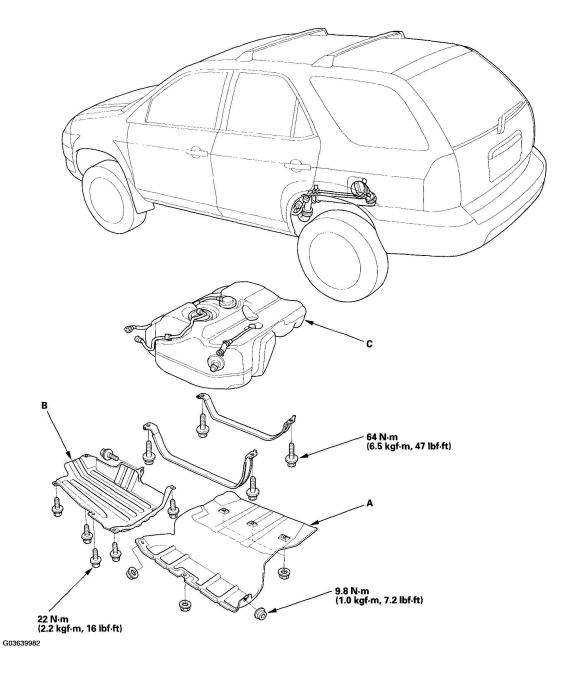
Exploded View Of Fuel Tank (2005-06 Models) Courtesy of AMERICAN HONDA MOTOR CO., INC.
